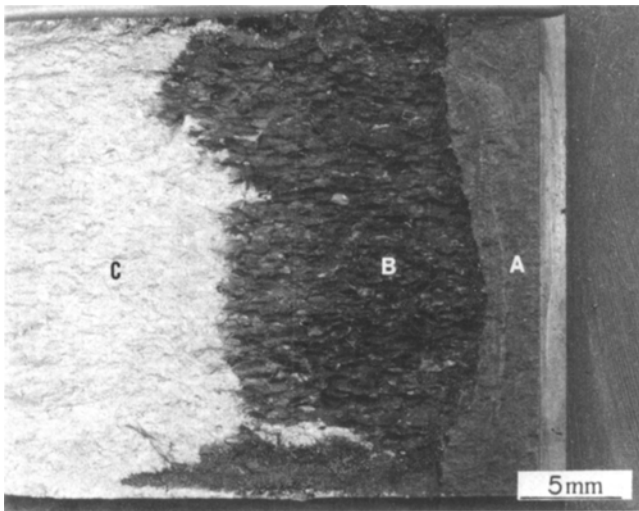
Fracture surface of alloy 600/I-182 WOL specimen. Fatigue precrack (A), IGSCC (B), and room temperature air fracture (C) are shown.
